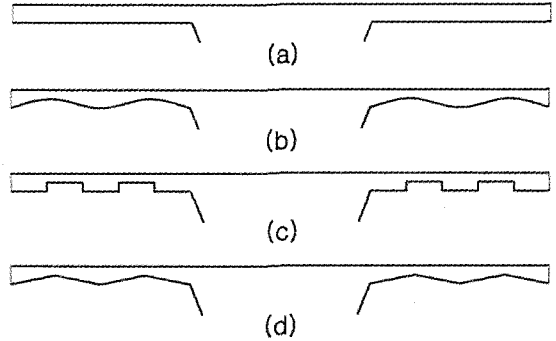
Four pad types: (a) Straight pad, (b) waved pad, (c) grooved pad, (d) skewed pad.
